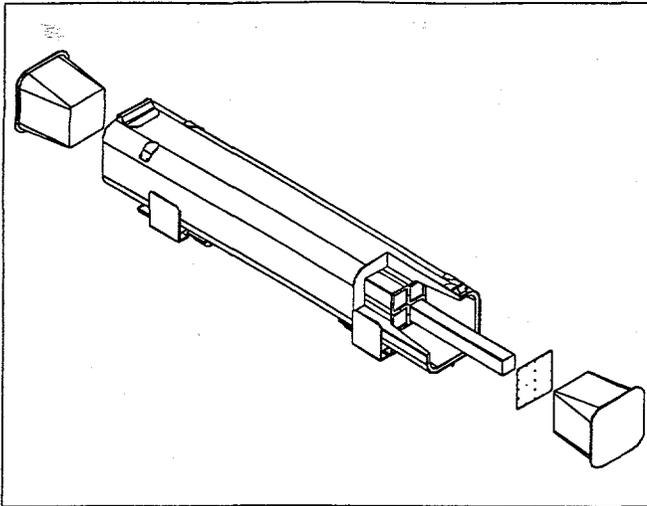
Cutaway view of end-loading MOX package concept for PWR fuel
